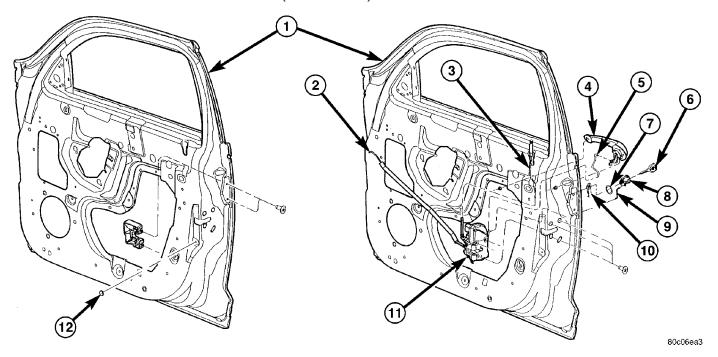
FRONT DOOR OUTSIDE HANDLE
